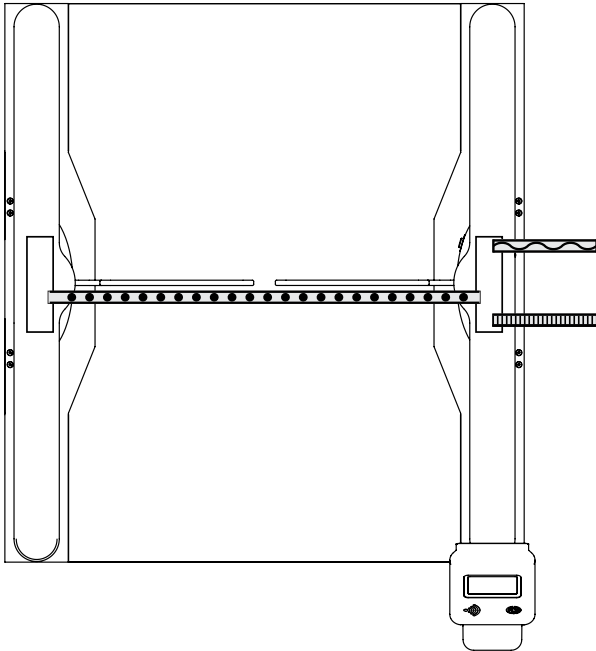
28" Single Lane - Plan, Elevation & Footprint Drawing
